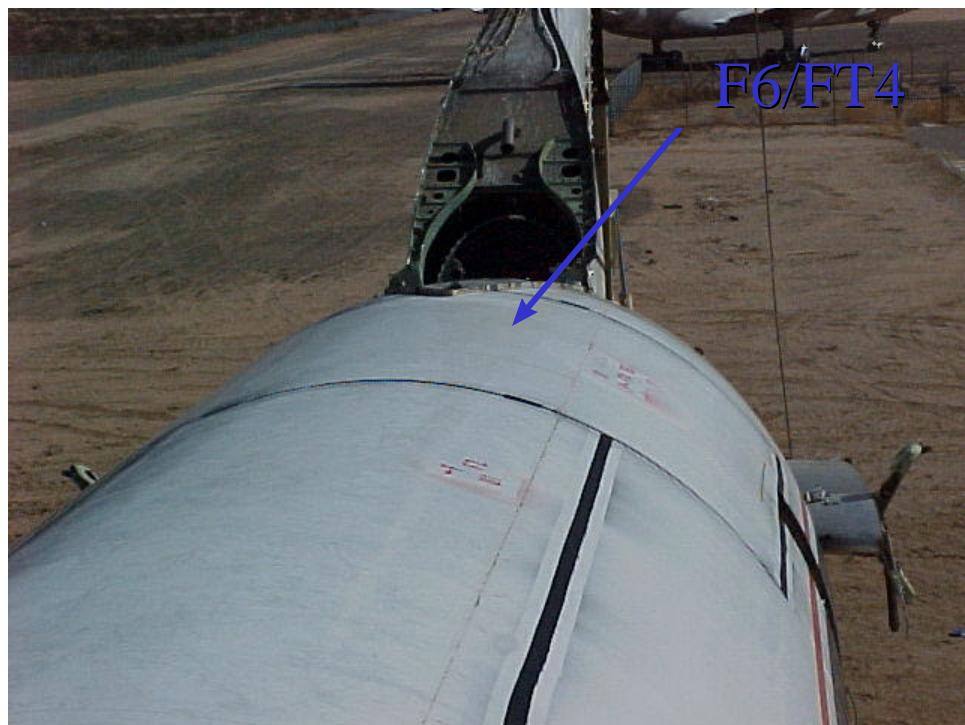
F-6/FT-4, Large Crown Panel 4 before removal.
